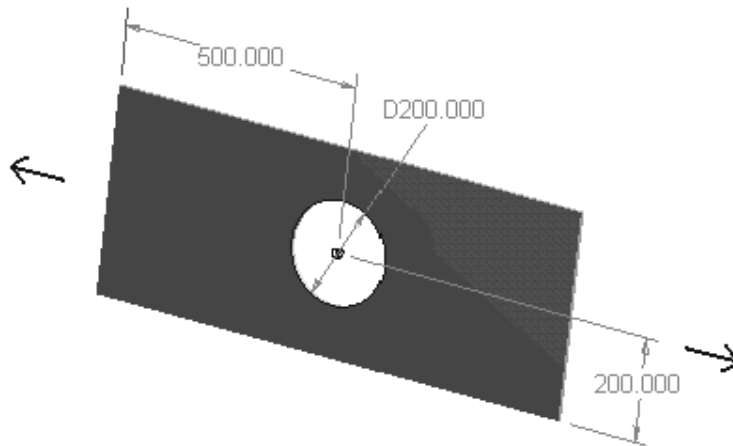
Thin plate (10 mm thick) with central hole; dimensions in mm.
